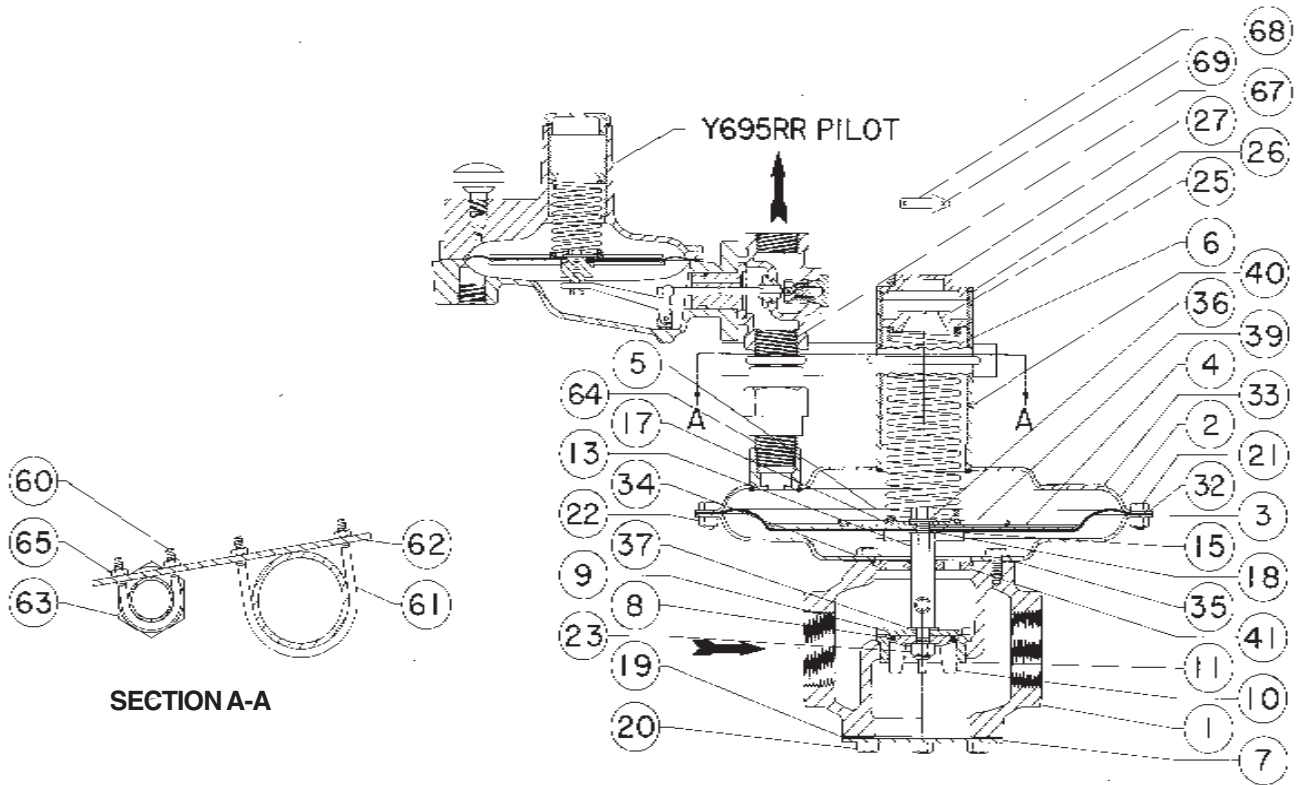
Type 66RR Main Valve and Pilot Mounting Parts
